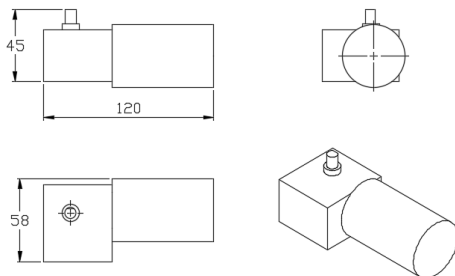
GW4468-80 type worm geared motor outline dimensional drawing.
